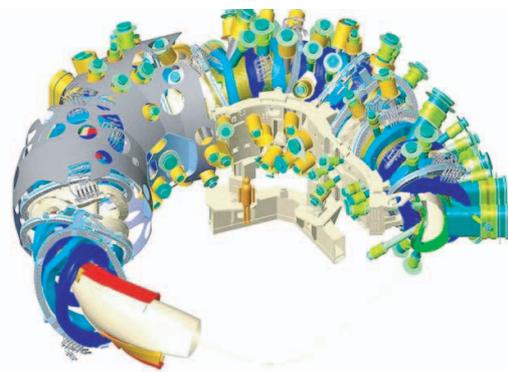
Cutaway of a CAD drawing of W7-X showing the plasma and the divertor plates (lower left), the magnetic coils around the plasma vessel with inner support structure (upper right) and the Outer Vessel (upper left).
